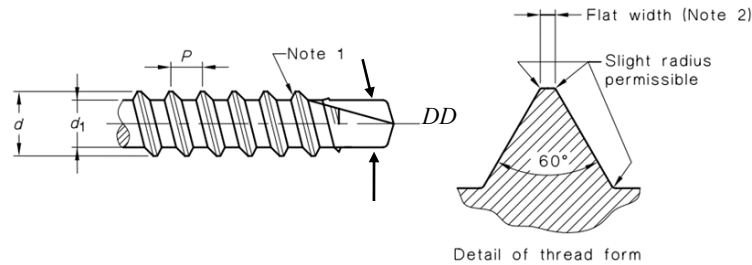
Screw fastener thread details: d – major (thread outer) diameter, d_1 – minor (thread inner) diameter, p – pitch and DD – drill point diameter
